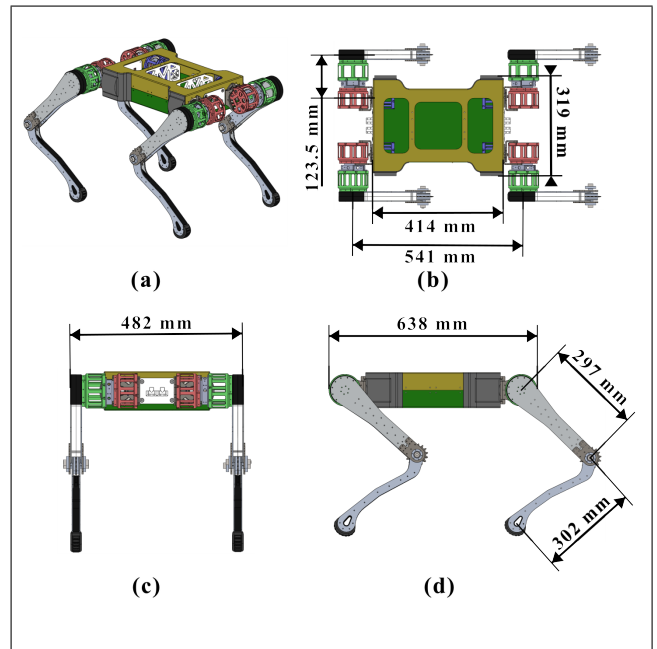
Robot Dimensions: (a) Isometric view of the robot: The torso is made up of two sheet metal parts (yellow and green), with two plastic parts (white and inside the torso) joining them (b) Top view, (c) Front View, (d) Side view
